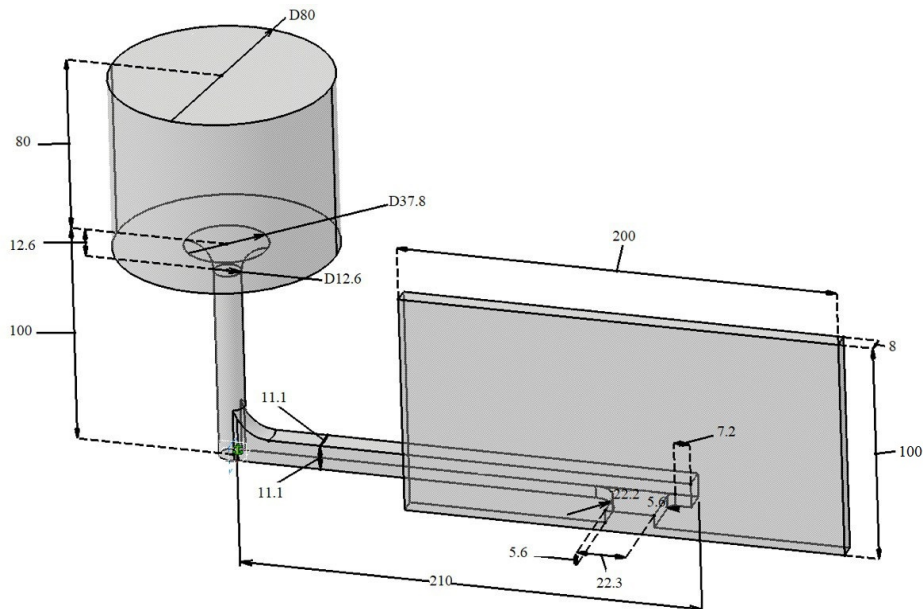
Schematic of geometry intended for gravity casting (mm)
